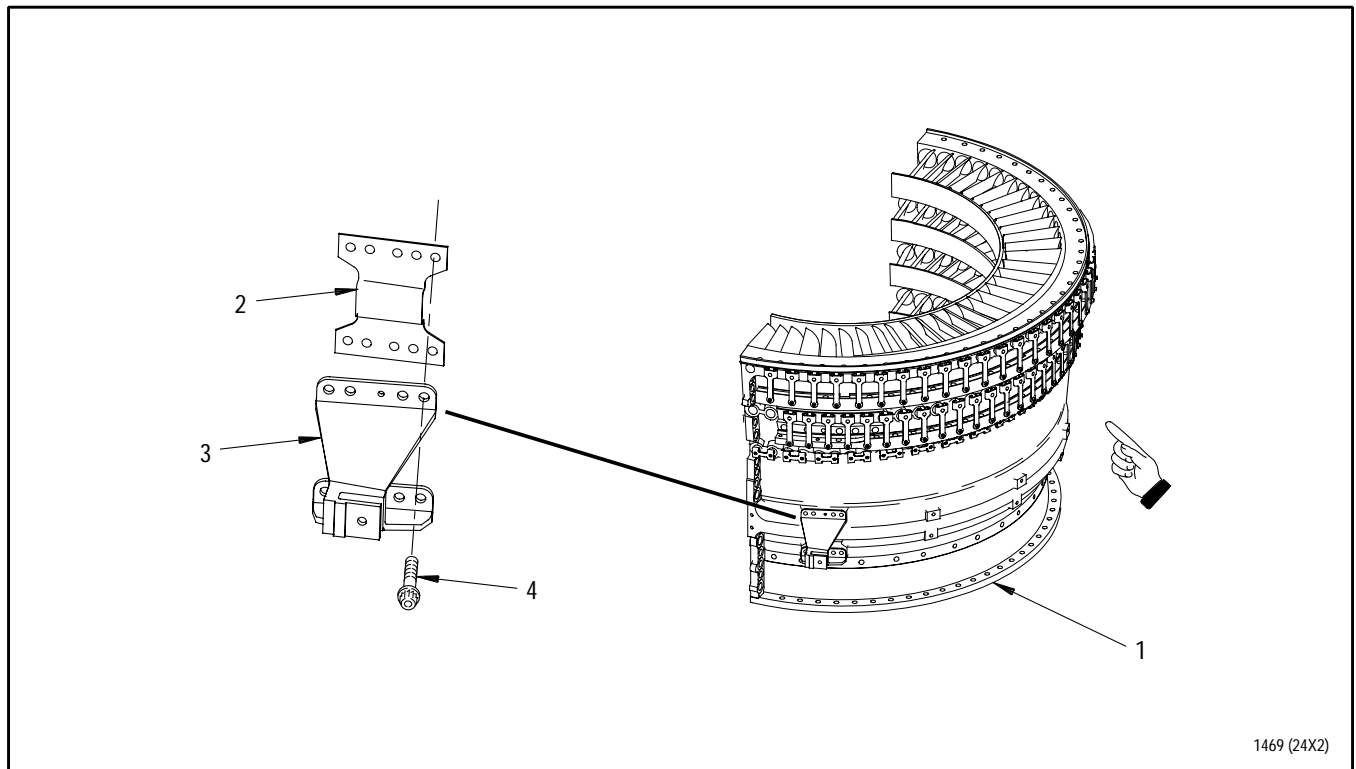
Compressor Stator Linkage Arm Bracket and Bleed Valve Strap Seat - Installation
